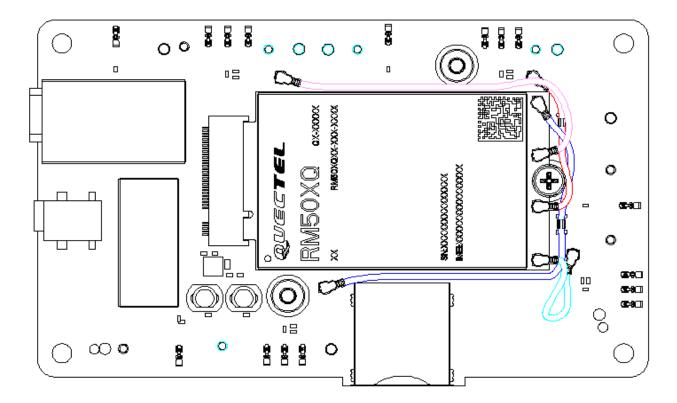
RM500Q-CN/RM500Q-GL RF Cable Assembly
